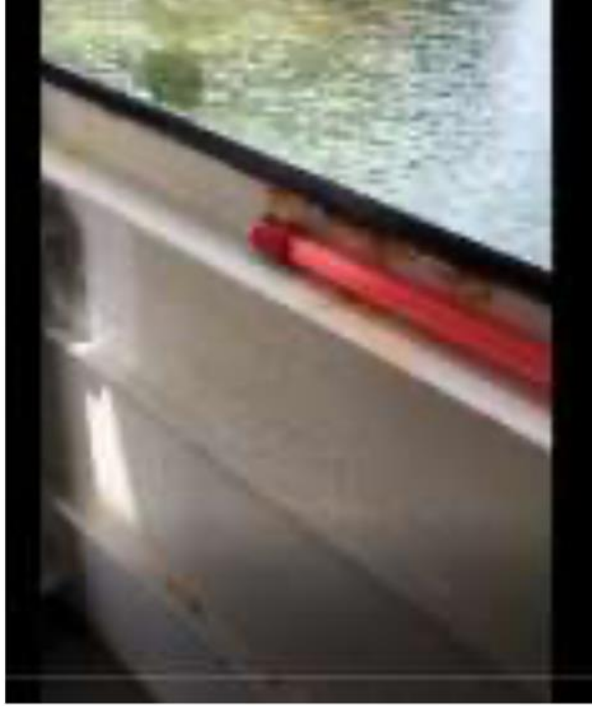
Insufficient sealing causing stbd side shell to rust from improper window sealing.
